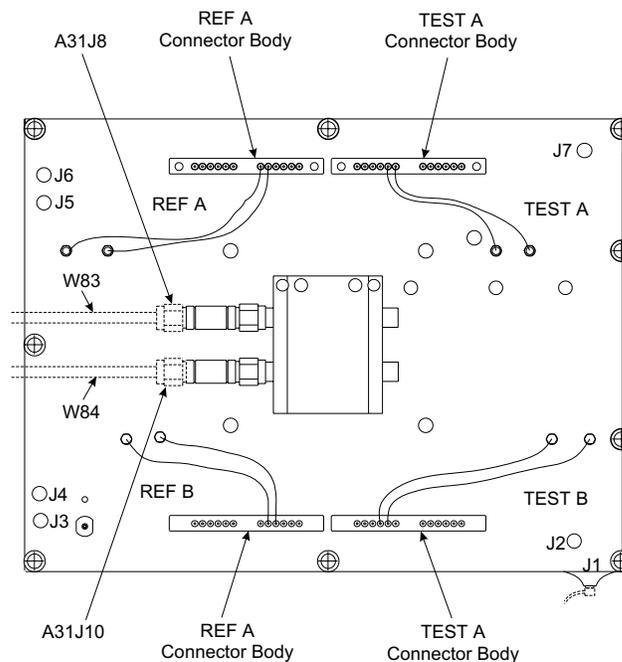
A31 Buffer Amplifier/Sampler Assembly, Details
